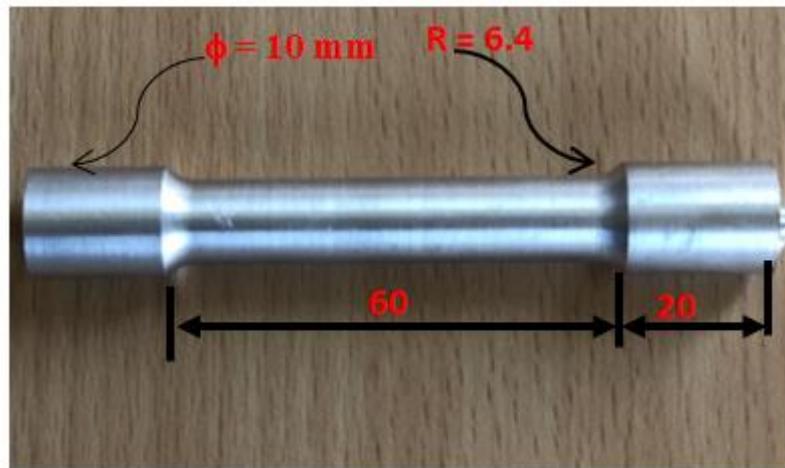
Tensile Specimen with Dimensions in (mm) according to ASTM370
